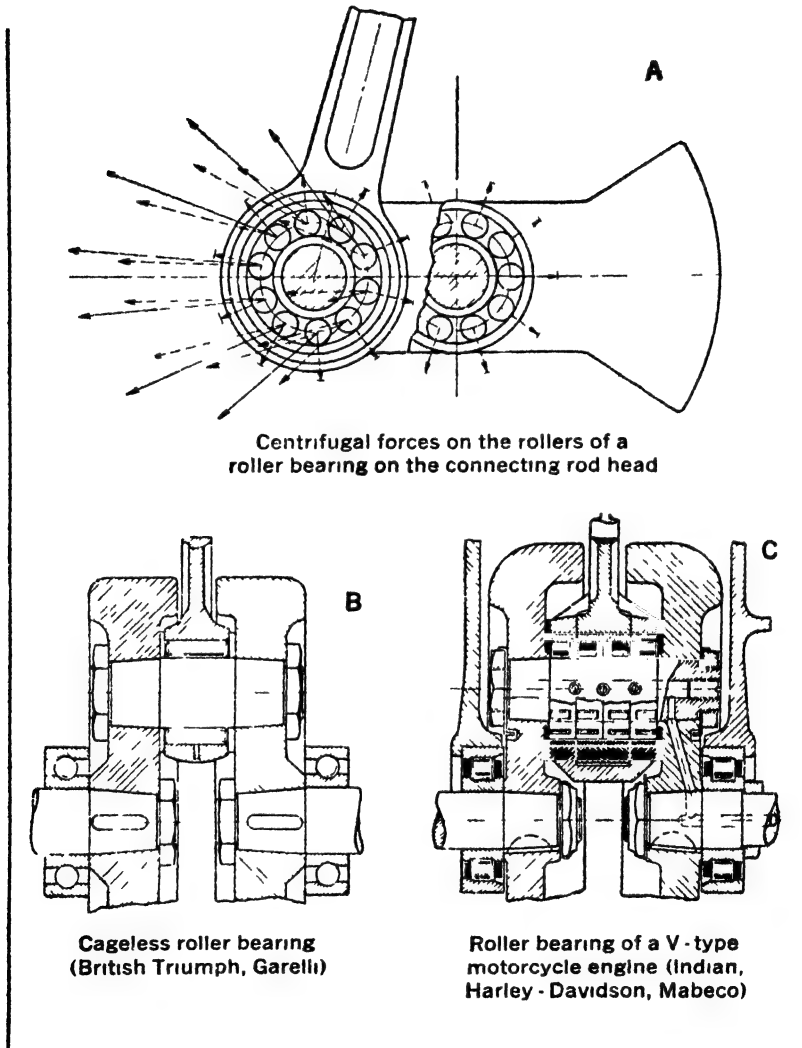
View at A Shows the Centrifugal Forces on the Roller Bearing of a Connecting Rod Head. B—Cageless Roller Bearing Used on Triumph (British) Motorcycle Engine. C—Roller Bearing Design on "Vee" Type American Motorcycle Engines.
